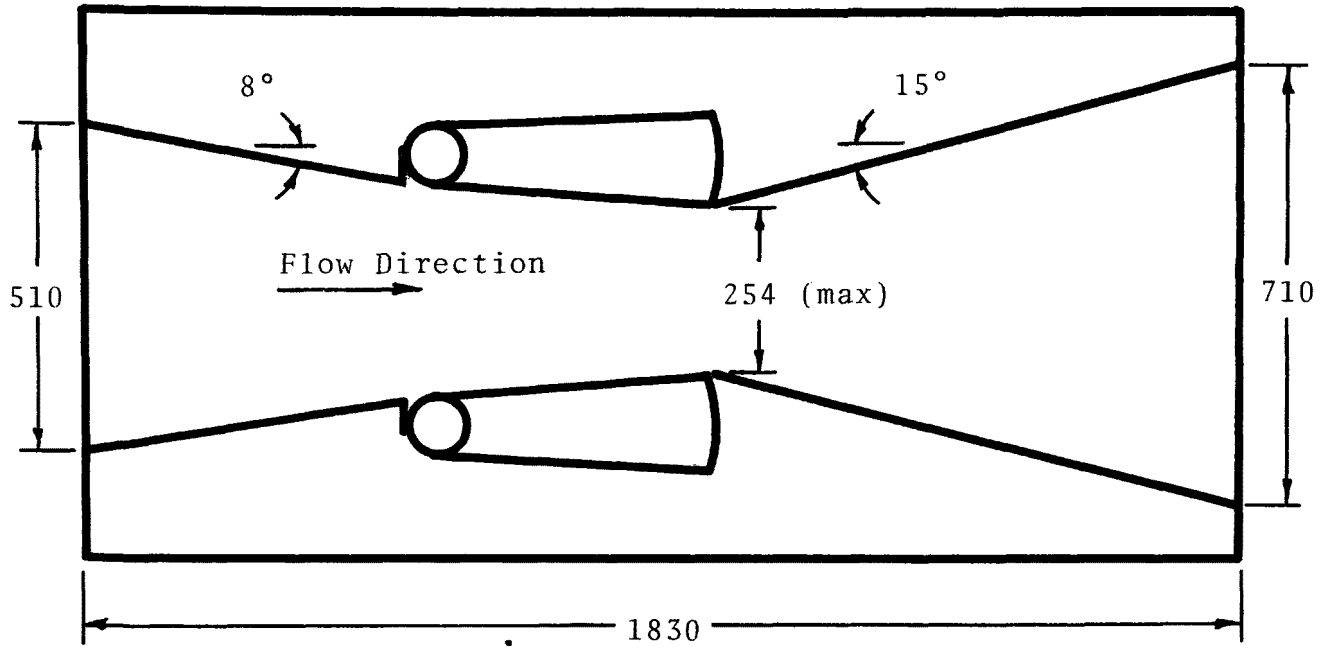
Schematic top view of A.A.F. Kinpactor 10 x 56, shown in fully open position (dimensions in millimeters).
